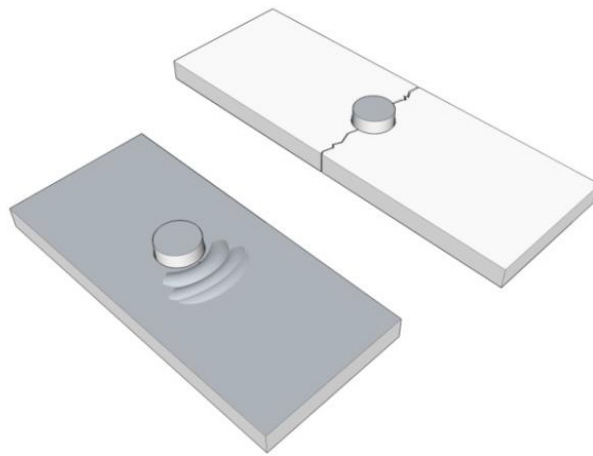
Fracture behaviour of a bolted joint in FRP [Nijssen, 2015]
